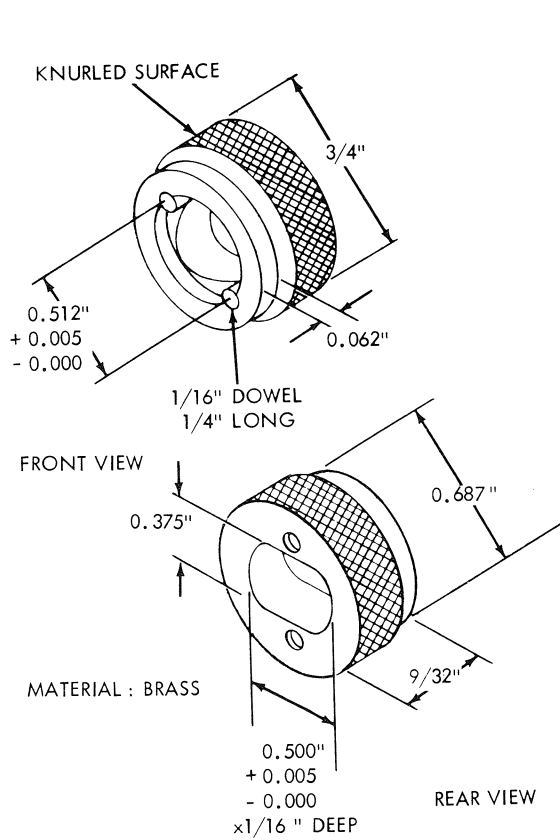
SHUTTLE CAM ADJUSTING TOOL ST-5884
